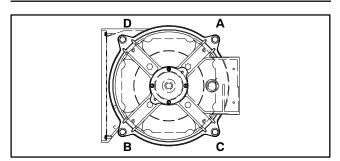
End Bracket: A, B, C, D Tightening Sequence
